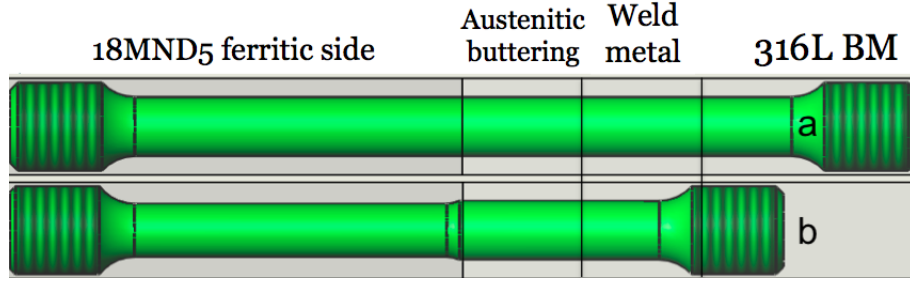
Machining of tensile specimens in a SS DMW mock-up : (a) crossweld specimen with homogeneous diameter and (b) crossweld specimen with variable diameter
